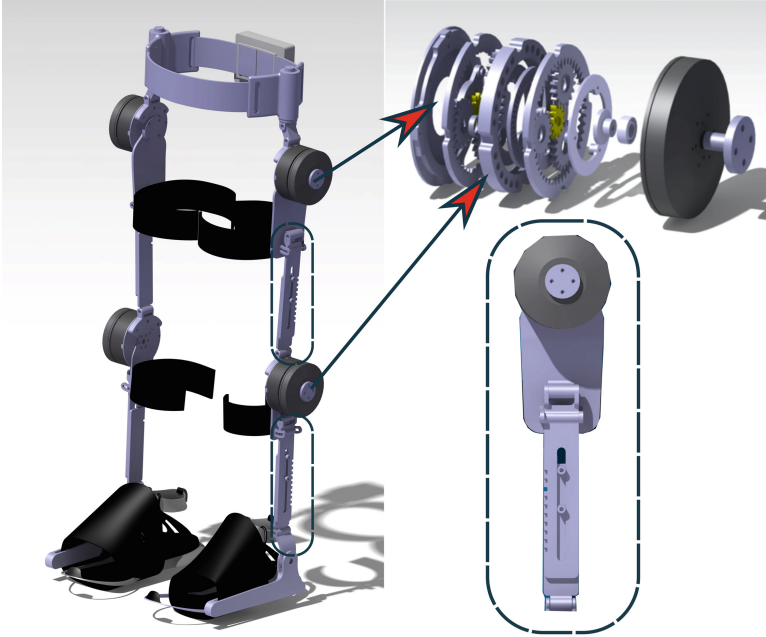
(left) Isometric view of the finished exo-suit (right) Exploded view of planetary gears and Dc Motor.
